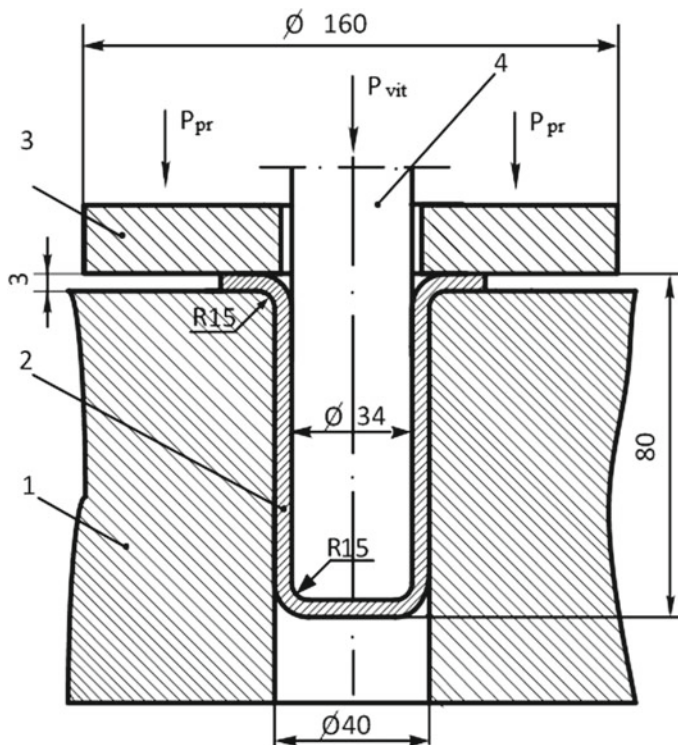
Geometrical parameters of the stamping tool model at cold deep drawing of sheet steels with a clamp: 1—matrix; 2—preparation; 3—clamp; 4—punch
